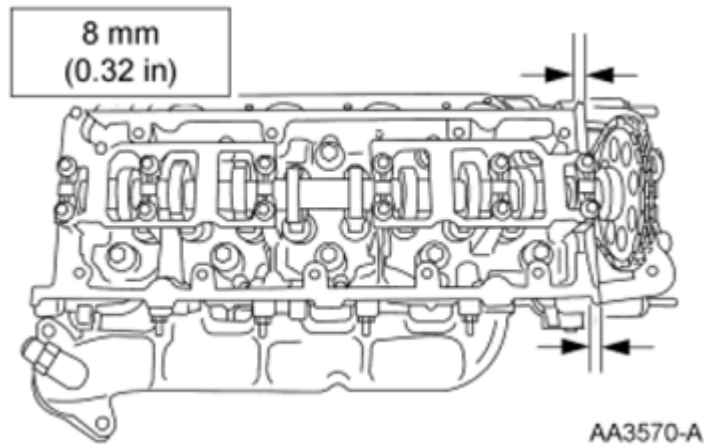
Identifying Engine Front Cover And Cylinder Head Sealant Apply Area With Specifications
